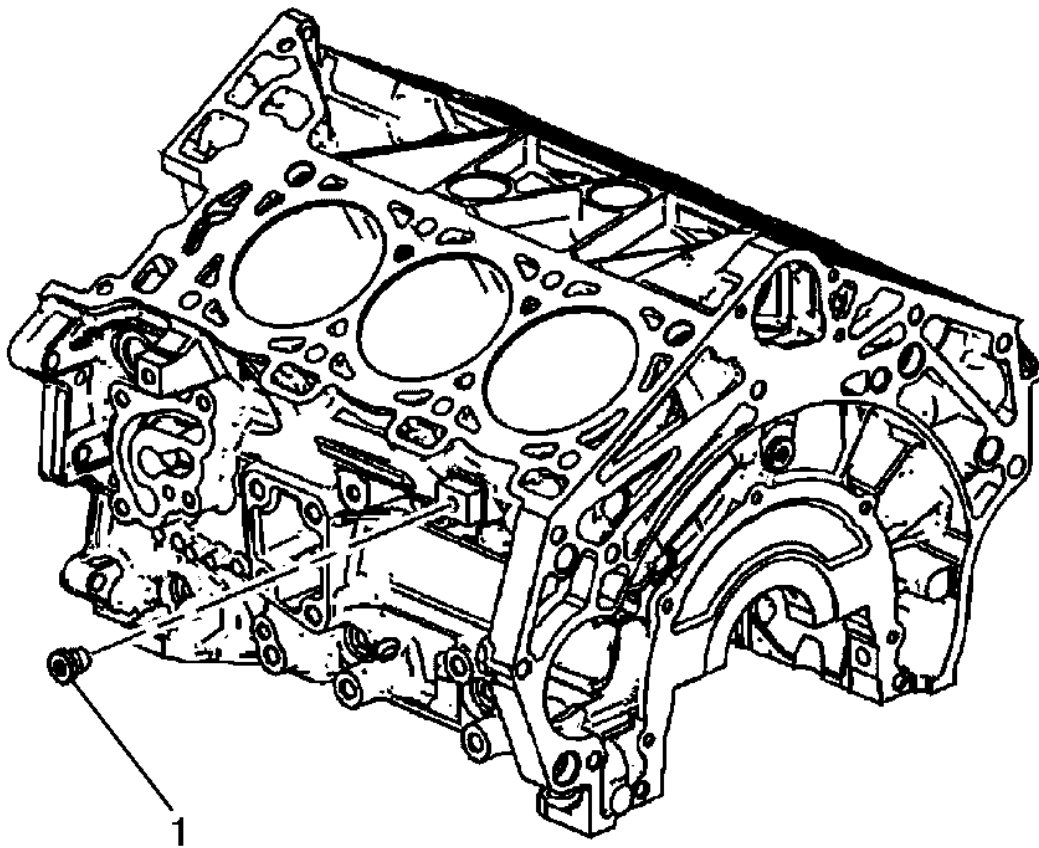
Identifying M20 Left Side Oil Gallery Threaded Plug
